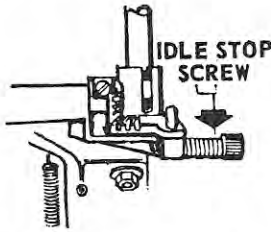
Late motors have a slow speed stop screw on speed control vertical shaft gear as shown. Screw is on port side of motor.
